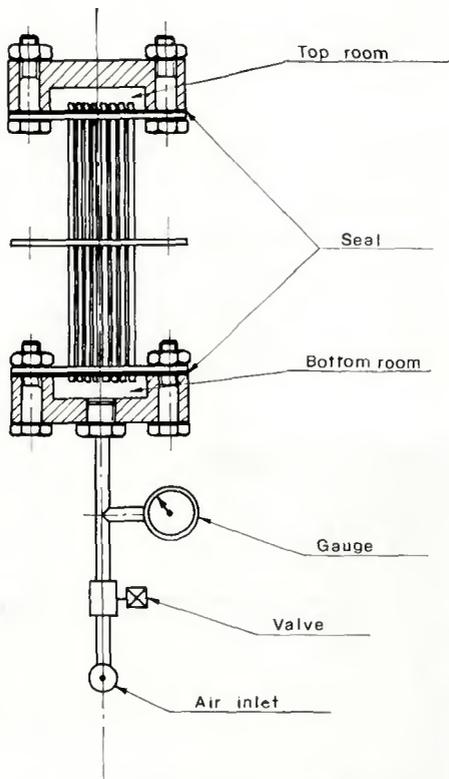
Sketch of equipment for pressure tightness test on brazed recuperators
